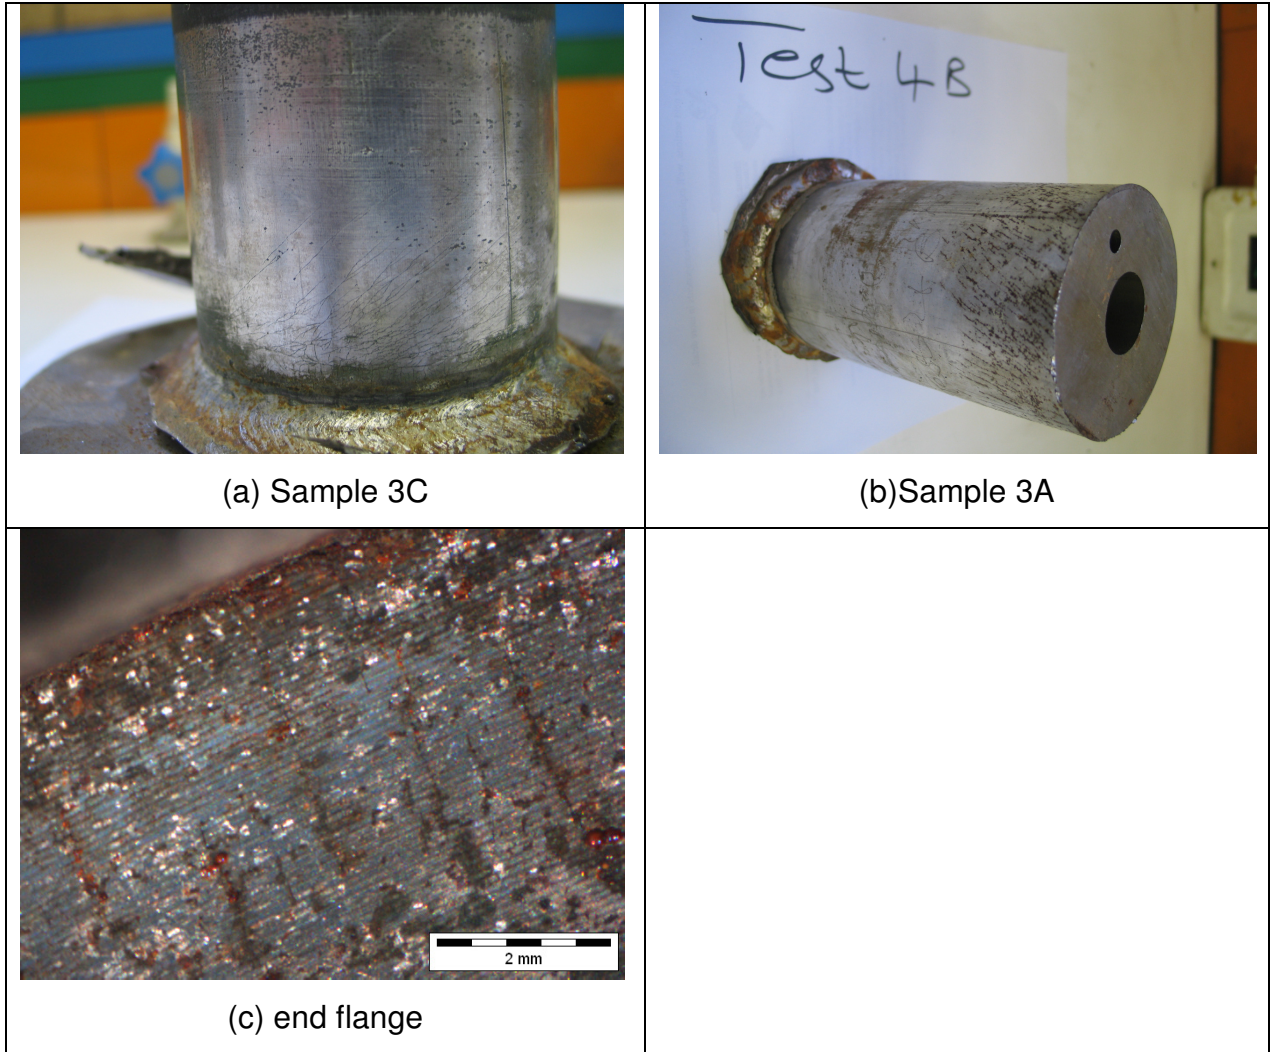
Cracking of test rig other than in the tubular sample: (a) bar of test 3C, (b) bar of test 3A, and (c) end flange of sample 5C close to weld with sample (see also Figure 6.5)
